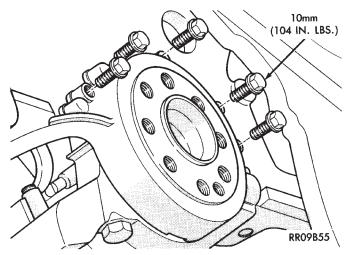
Crankshaft Oil Seal Retainer—Rear
